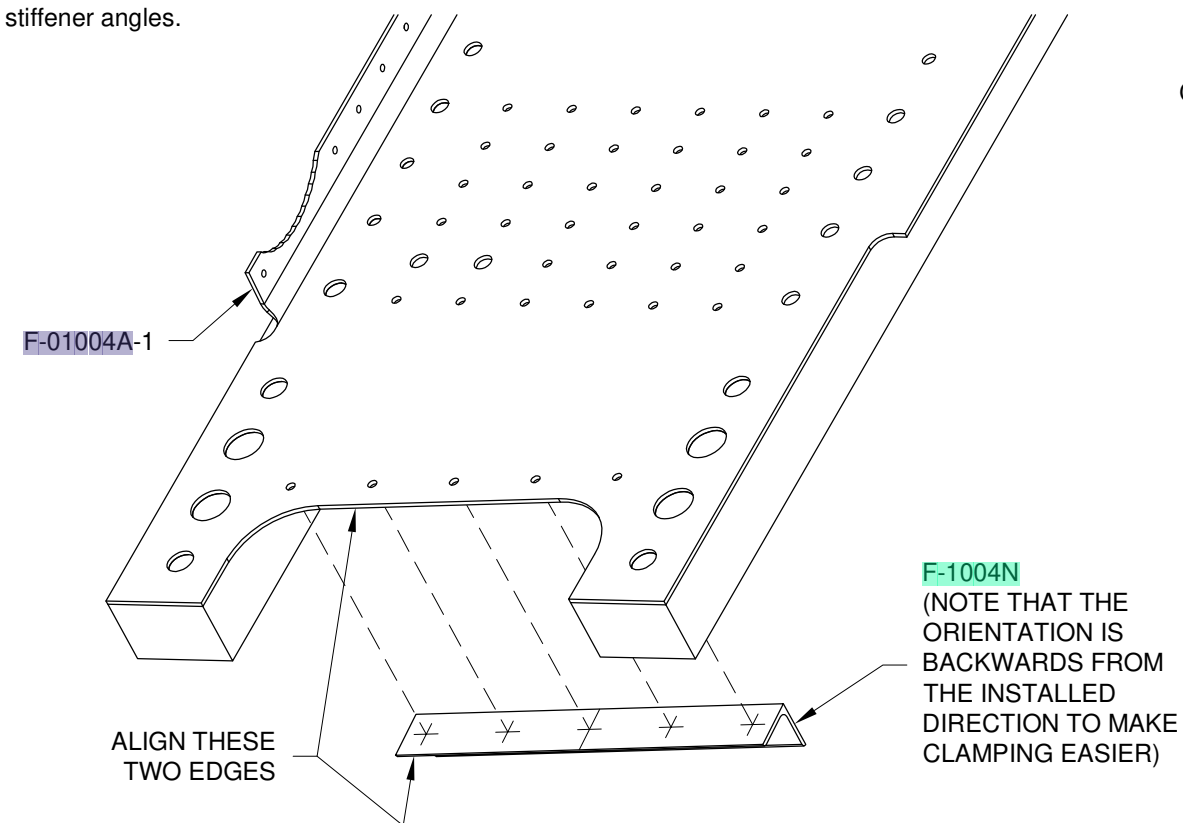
MATCH-DRILLING STIFFENER ANGLES
